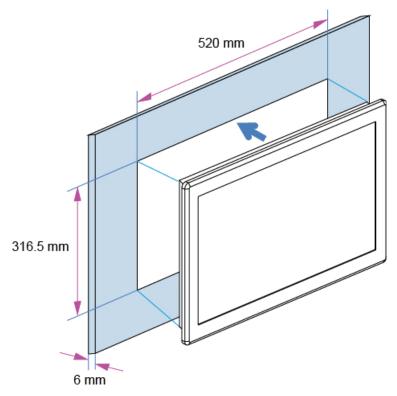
Panel Mount Cut-out hole and maximum panel thickness
